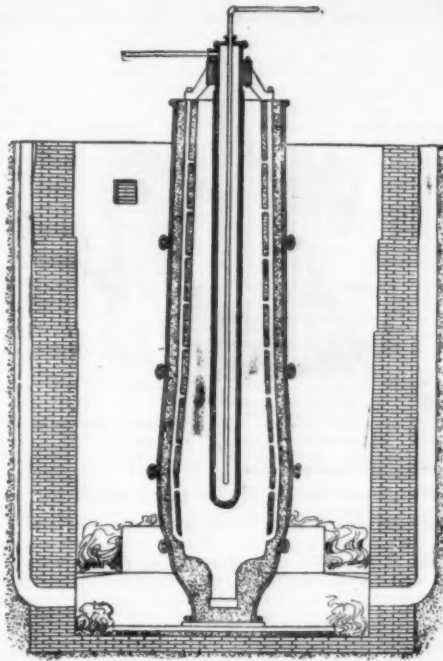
PIT AND MOULD READY FOR RODMAN CASTING.
